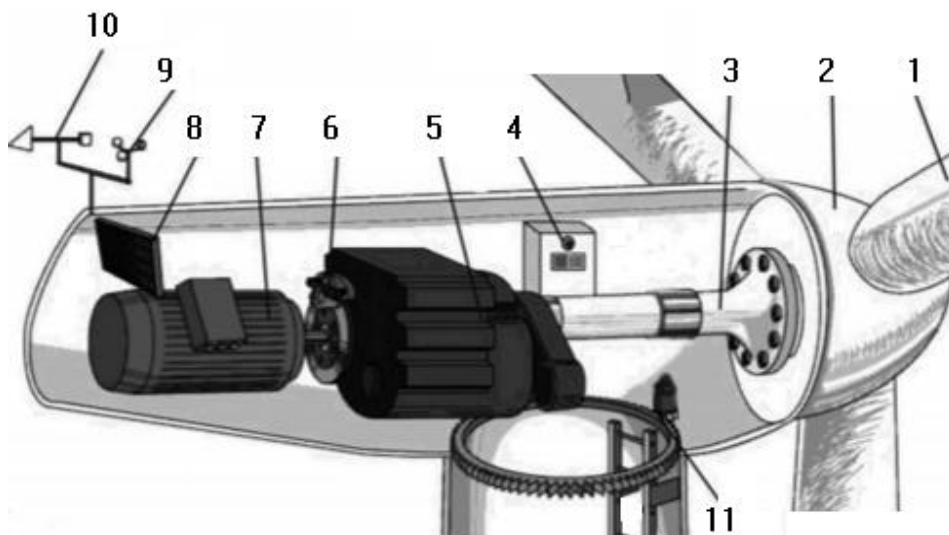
Schematic representation of single structural unit with sensor implantation; 1, impeller blades (S1); 2, hub (S2); 3, main shaft (S3); 4, controller (S4); 5, gearbox (S5); 6, mechanical brake (S6); 7, generator (S7); 8, cooling system (S8); 9, anemoscope (S9); 10, wind vane (S10); 11, yawing motor and yawing bearing (S11) where 'S' shows sensor number
